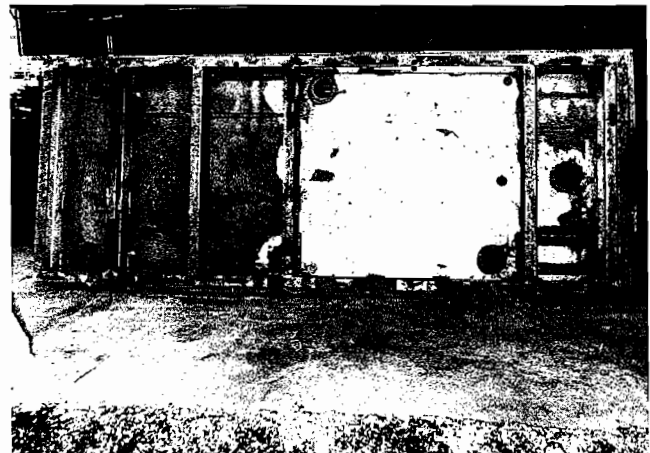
Large Baseplate Underside, as Received. Grout filling and vent holes are lacking in some sections, and not ideally placed in others. Generally, it is best to have one 4 in filling hole at the center of each bulkhead section, with one 1/2 in vent hole near each corner of the section.
